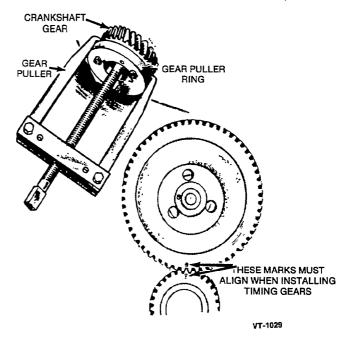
TIMING GEAR REMOVAL AND INSTALLATION
